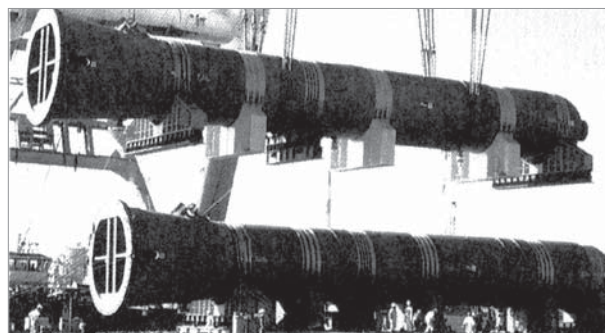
The world's largest heavy oil desulfurization reactor vessel having a shell of 330-mm thick and weighing 1400 tons (Photo source: Welding Technique Vol.47, Japan Welding Engineering Society)
